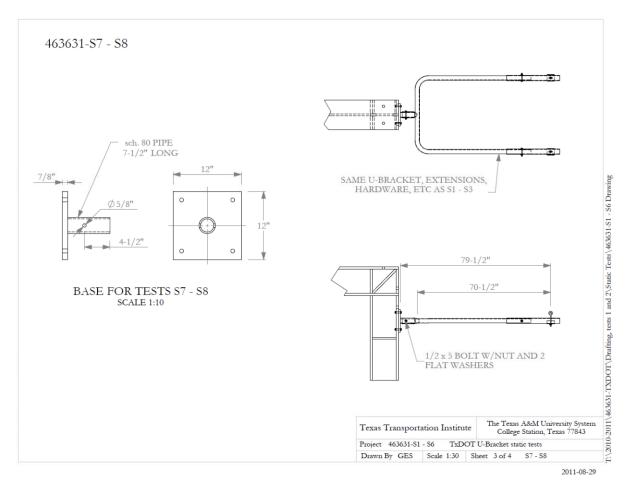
U-Bracket Support Static Test Setup Drawings.
